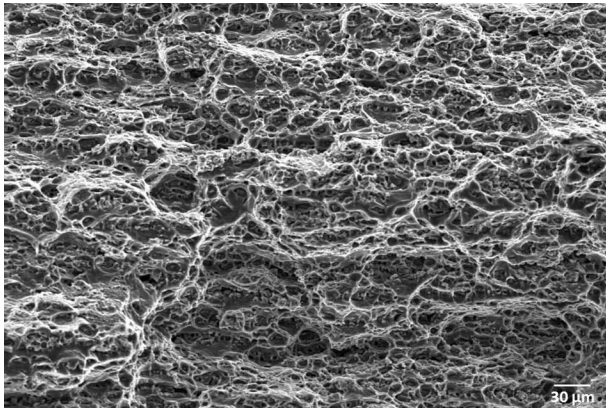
Higher magnified image of fracture surface shown in Fig. 105 indicating fine dimple indicating ductile mode of failure
